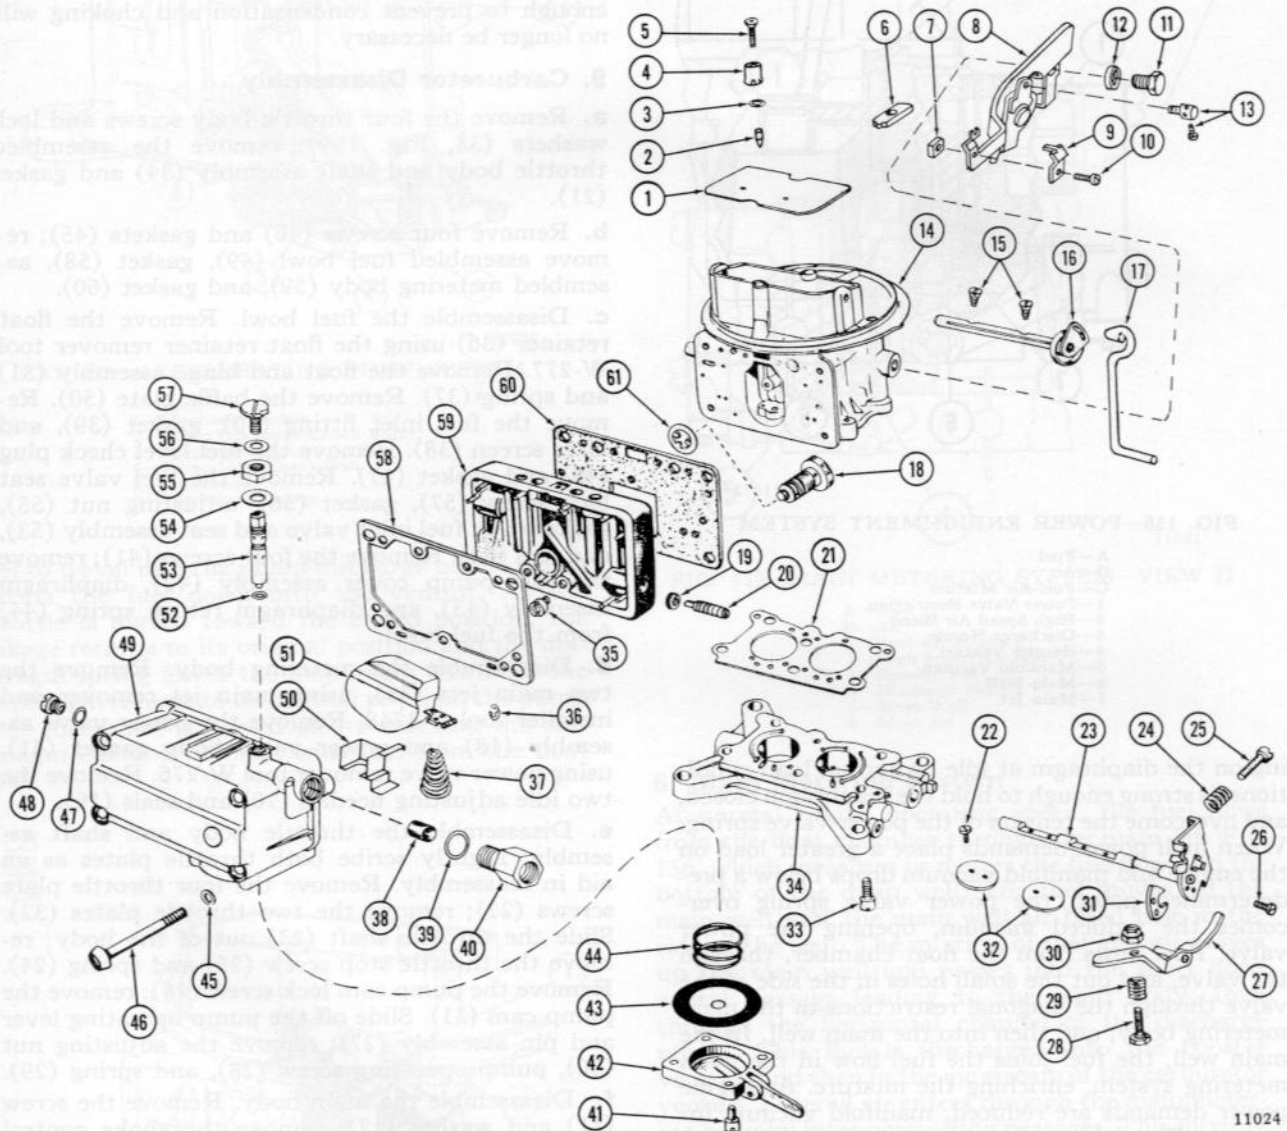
TYPICAL CARBURETOR, EXPLODED VIEW
